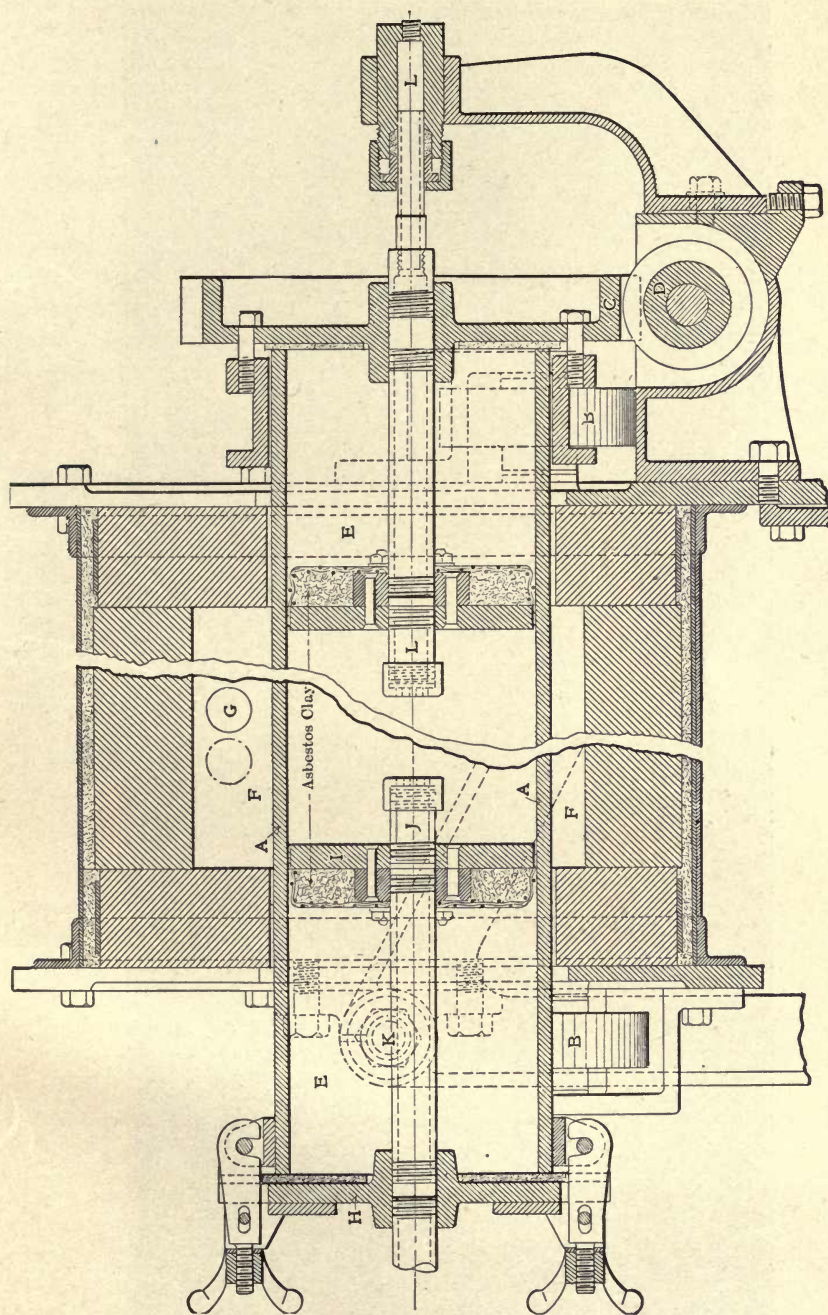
Sectional view of furnace for carbonizing with gas.
